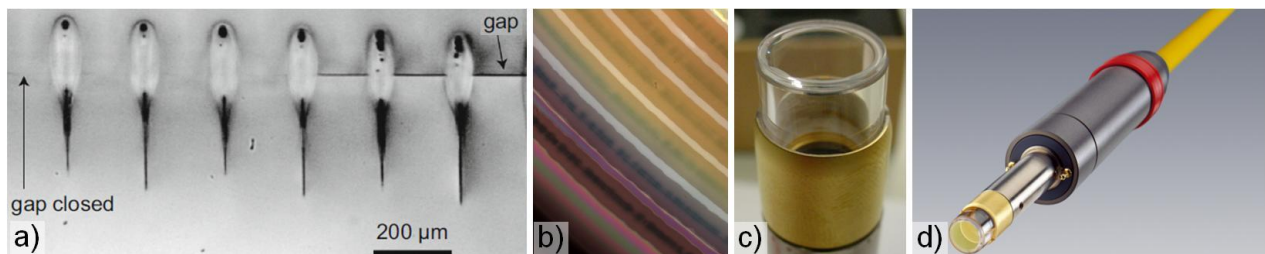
Ultra short pulse laser welding of fused silica. a): Gap bridging by tailored energy deposition ¹⁶. b): Image of seven parallel weld tracks of protection cap as seen through the AR-coated protective window welded onto a tube of fused silica. c) Welded protection cap with mount. d): Laser light cable with mounted protective cap.
